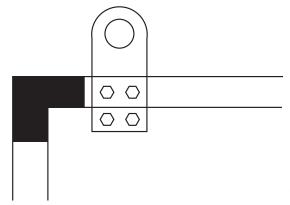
Transport lugs – roof, end wall and dividing joint
